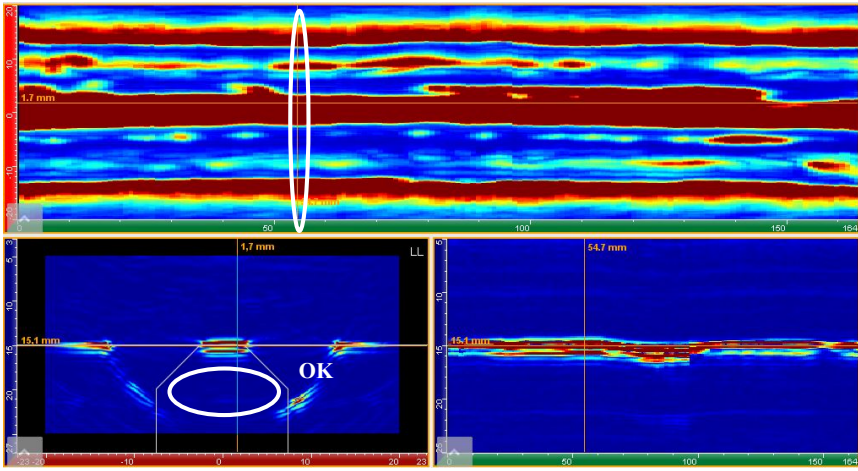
C-scan with TFM and D-scan of a good weld section with visible weld contours.
